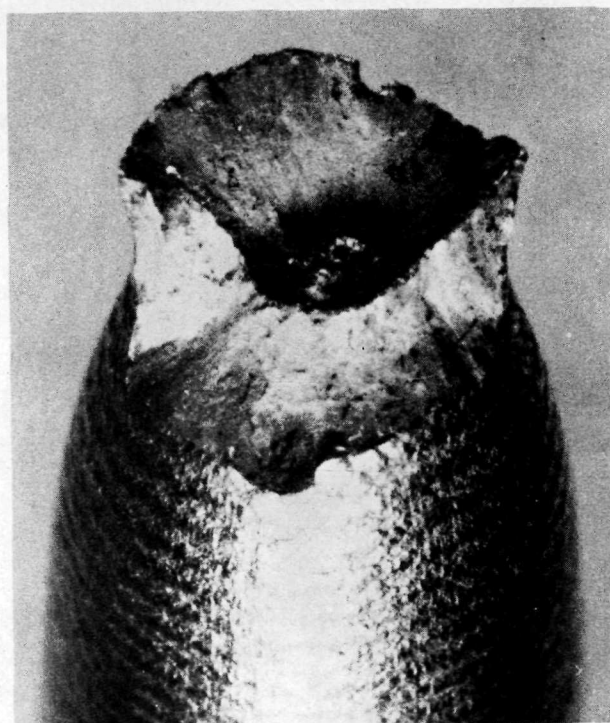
Fracture Appearance for Haynes -188 Smooth Bar
